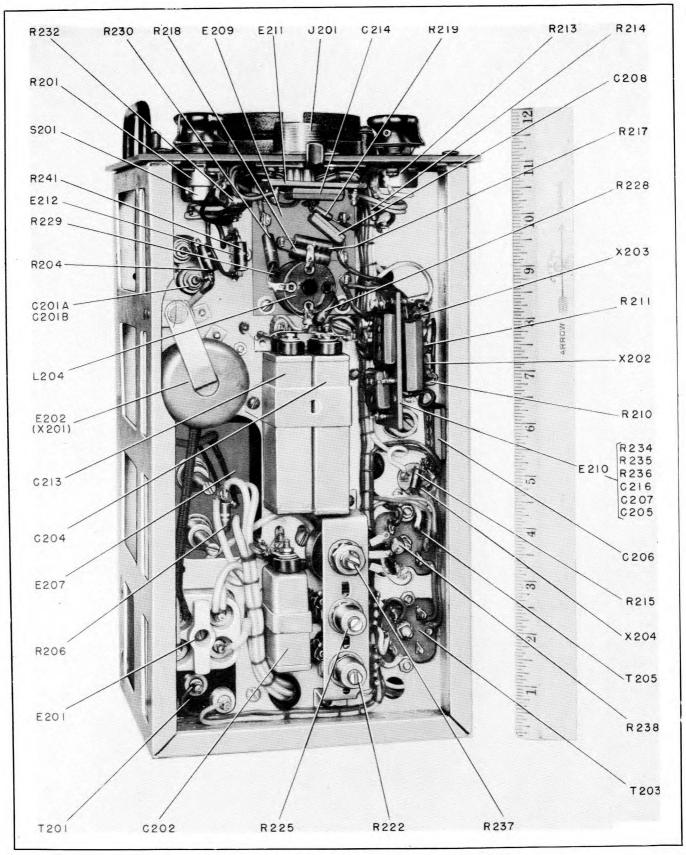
Indicator I-152-C — Chassis Bottom View
